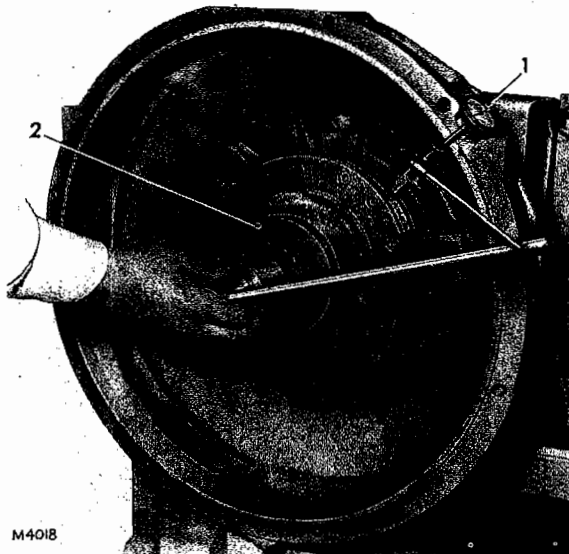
METHOD USED TO RE-ALIGN THE PUMP COVER
